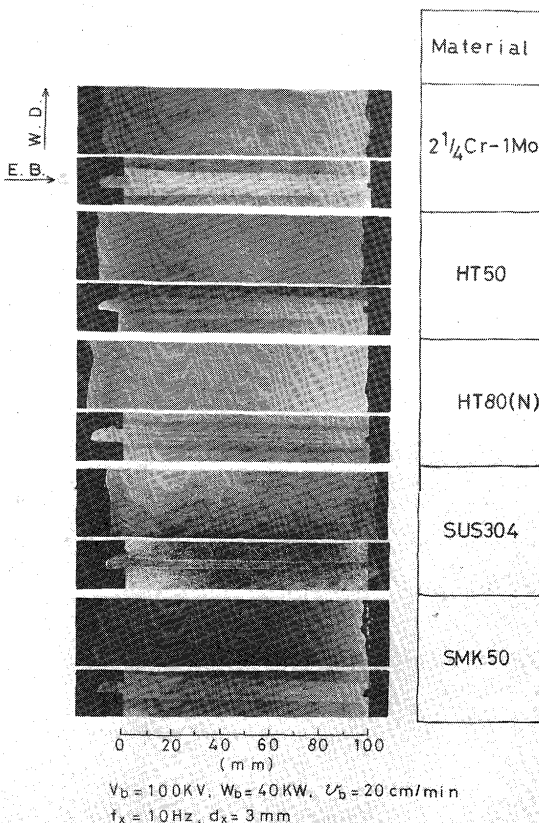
Fully penetrated bead section of horizontal position welding with various metals.
